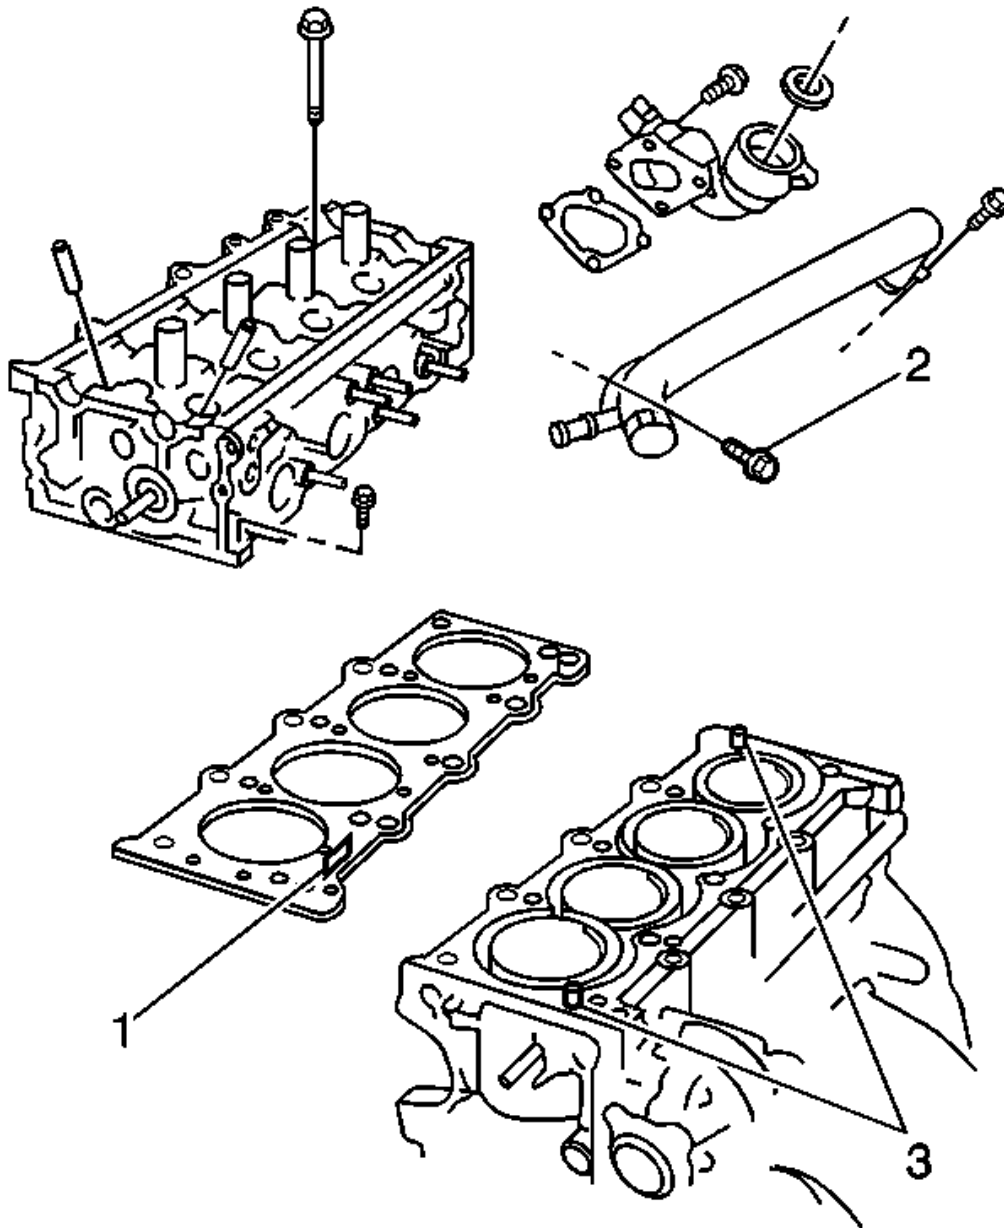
View Of Cylinder Head Gasket & Dowel Pins
